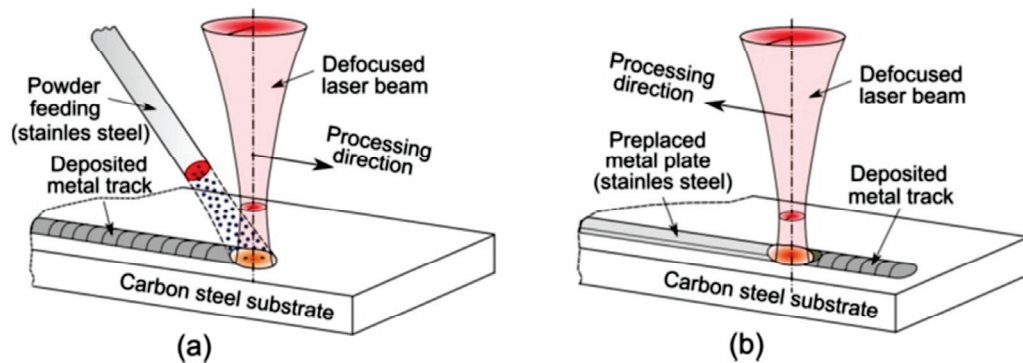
Weld overlay of carbon steel plates: (a) conventional processing using wire or powder as feedstock; (b) modified processing using a scrap plate as feedstock. Reproduced from [53].
